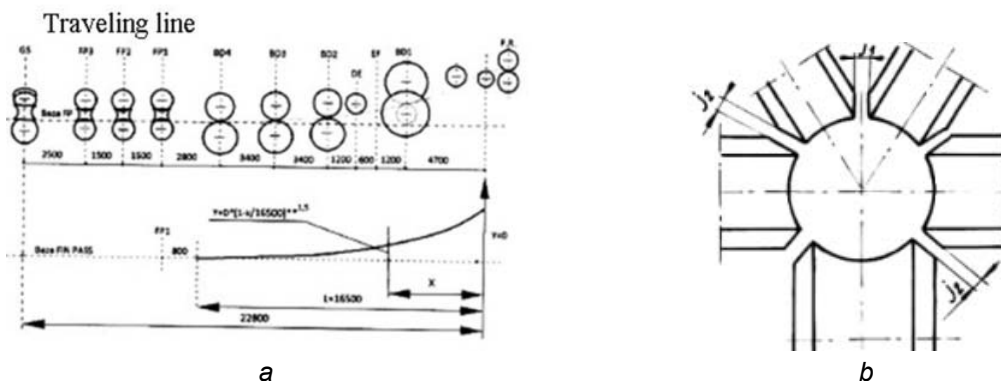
Technological line for contact welded pipes production b. final forming of pipe before welding b. formed pipe before HFCW
